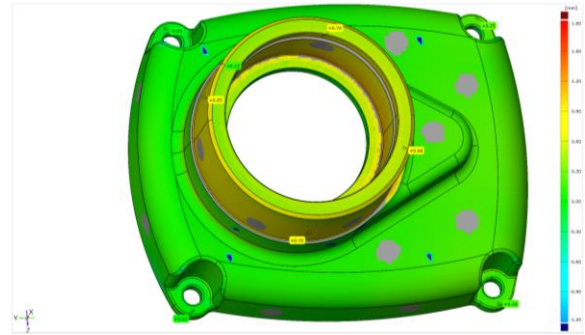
Mutual alignment of the reference CAD prototype and the digitized STL model of the lower half of the mixer gearbox (rough casting) [GOM GmgH]
